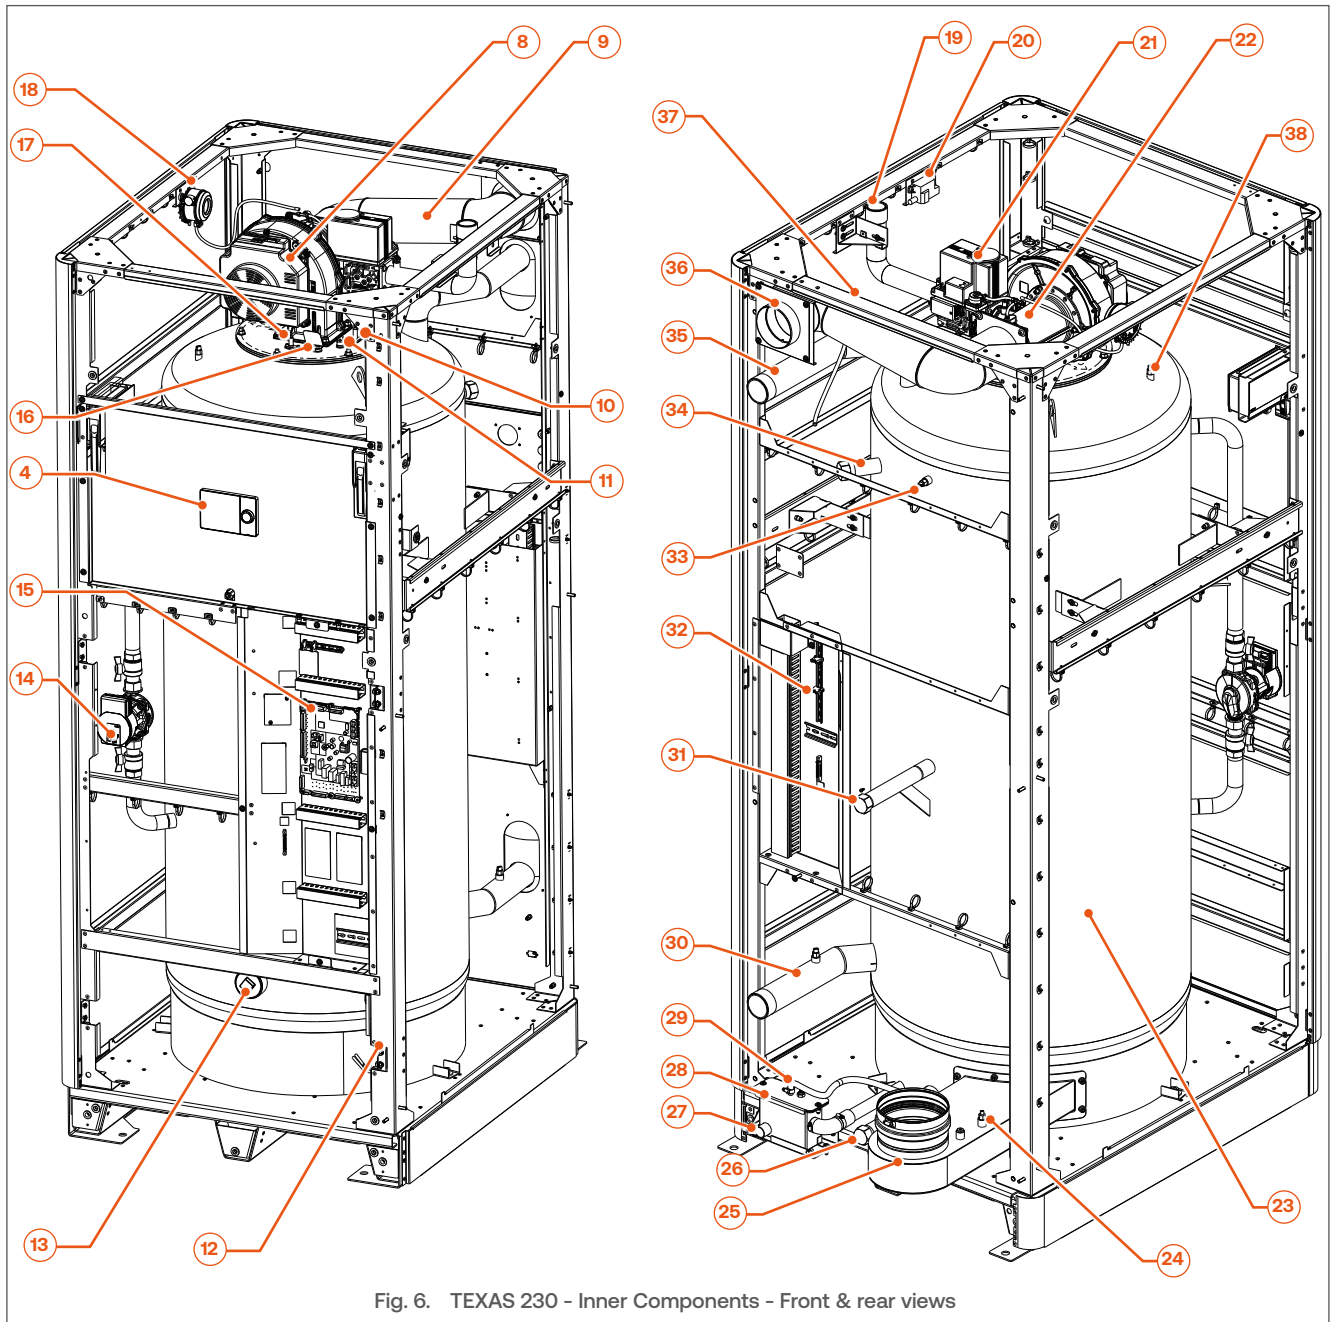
TEXAS 230 - Inner Components - Front & rear views
